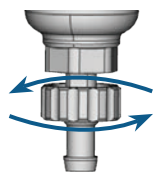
OPENING/CLOSING THE DISCHARGING SCREW AT THE SERVICE UNIT
